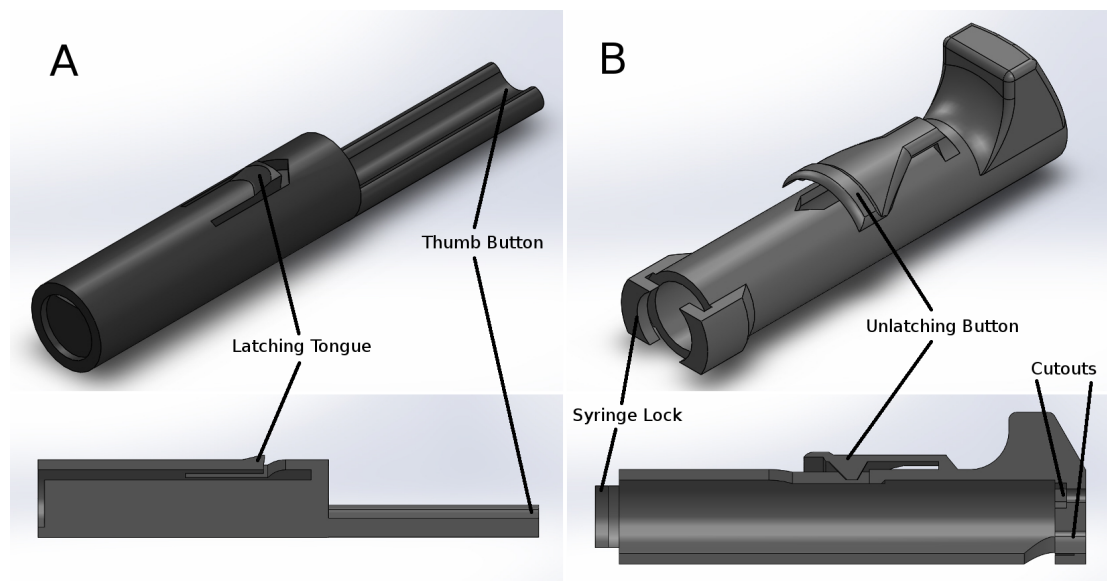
CAD renderings of printable parts and cross-sections. (A) The printed plunger part is a shaft that pushes on the syringe plunger and slides in the printed body part. The printed plunger has a latching tongue and button which interfaces with the printed body part. (B) The printed body part holds the syringe and interfaces with the printed plunger part. The body part features the unlatching button and slots to hold the syringe in place by its flanges. The body part also has two cutouts in the top for the plunger button and for the hex nut and bolt. Note that Fahad Bokhari prepared renderings of the CAD parts for this figure.
